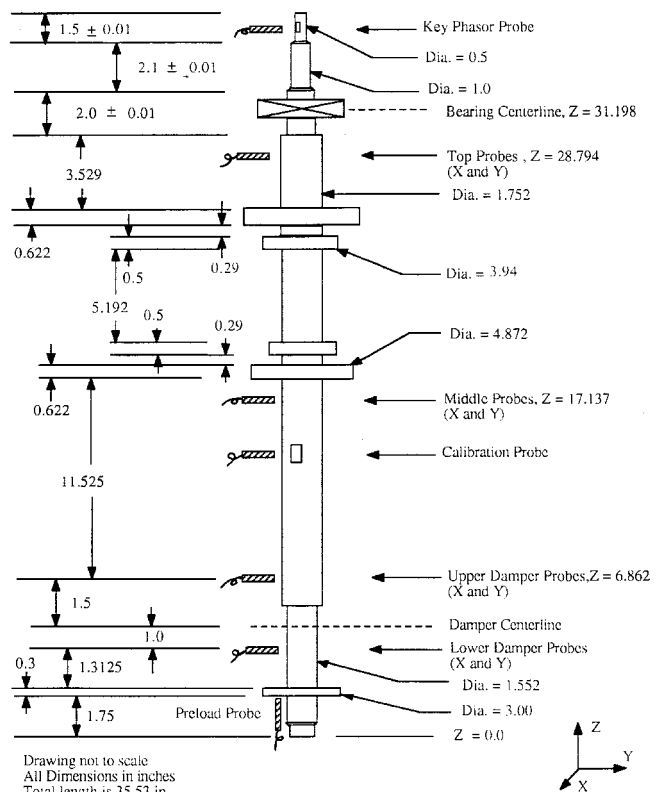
Rotor shaft with bearing, probe, and balance plane locations.
